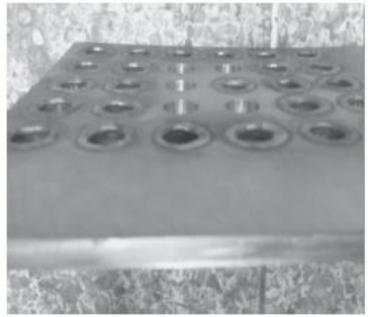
Mirror welding of heat exchanger in hyper duplex steel [Kim, et al., 2012]
